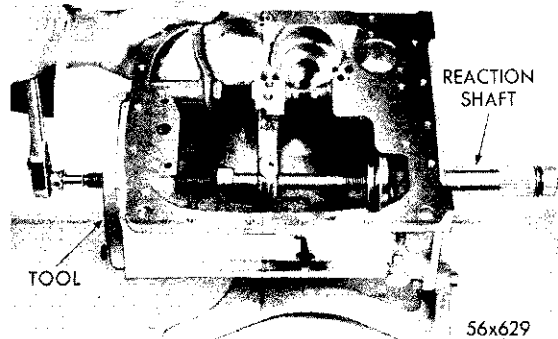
Removal and Installation of Torque Converter Reaction Shaft
